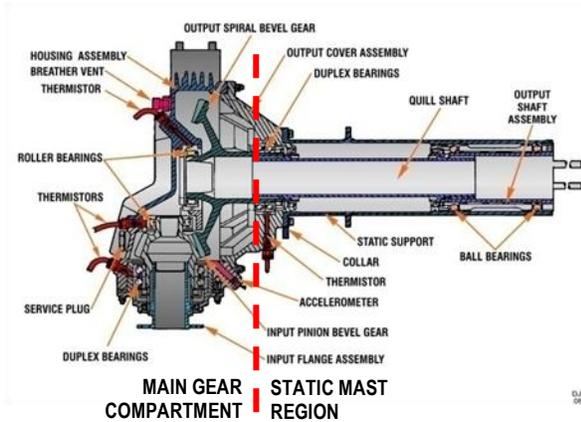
Internal components of an AH-64 tail rotor gearbox
